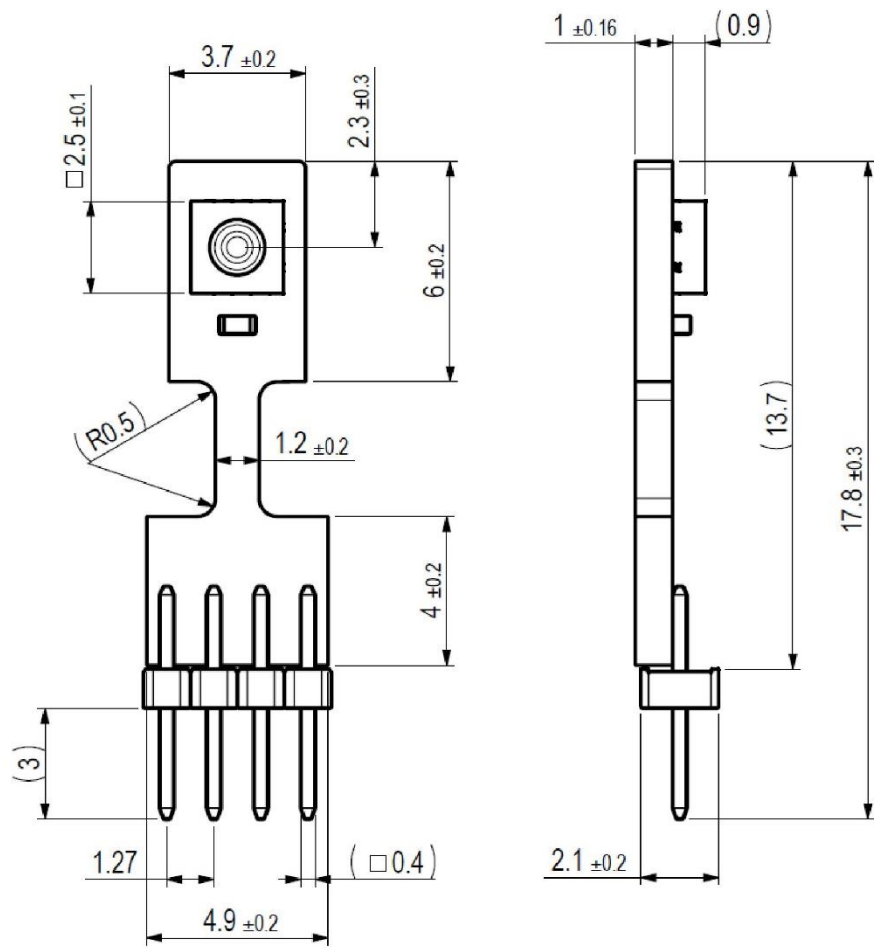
Dimensional drawing of the SHT85 sensor packaging. Dimensions are in mm (1mm = 0.039 inch).
